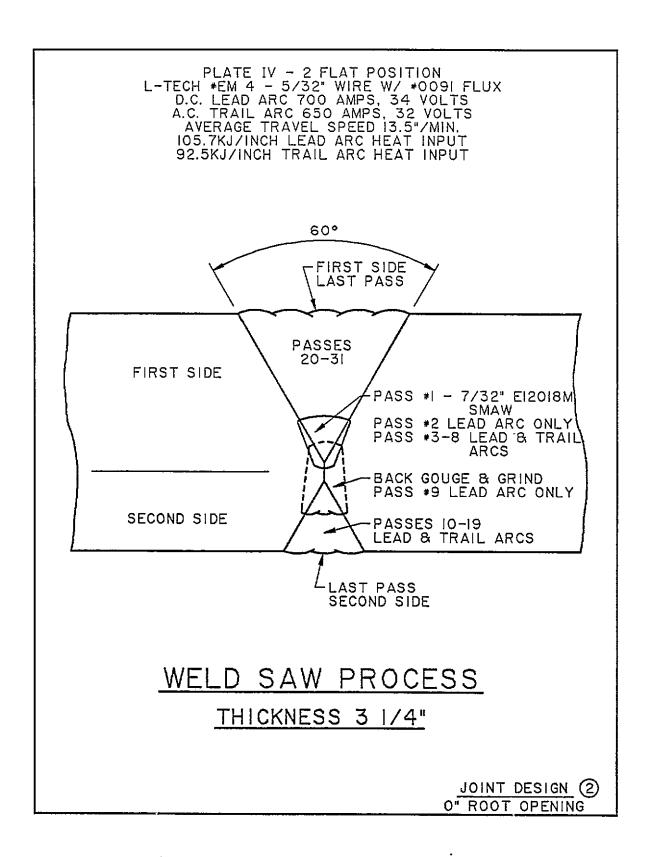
Dual Sub Arc Weld Test Assembly for 3-1/4-Inch Thick 100 ksi Yield Strength Steel Plate
